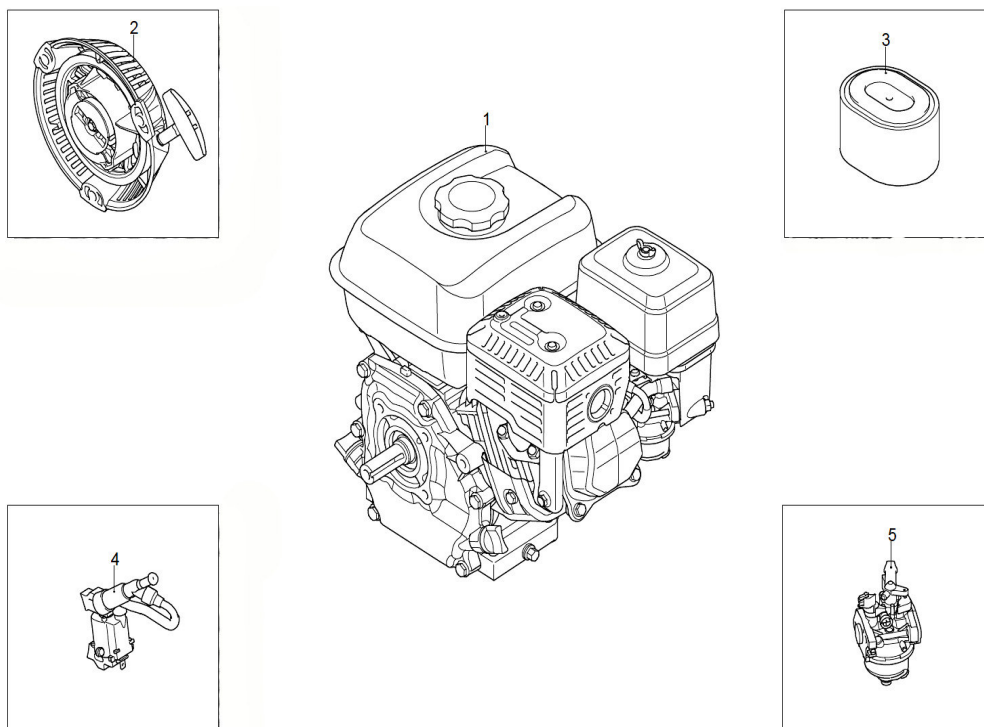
Spare parts drawing 5 HDR-K 72-22 BH
